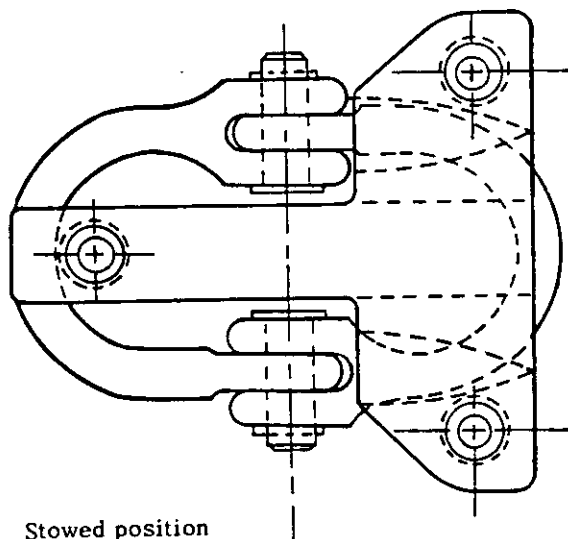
Classes 1 and 3 openings and clearance dimensions for slinging provisions on types I, II, III and IV equipment.
